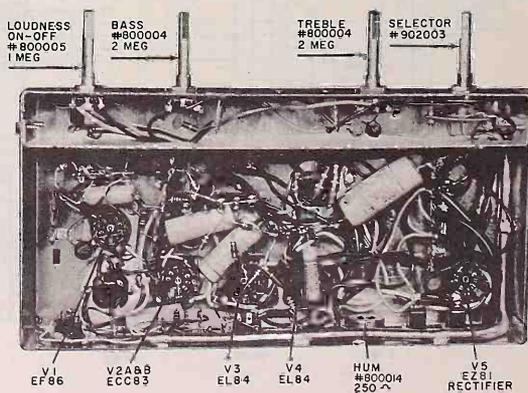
BOTTOM VIEW OF AMPLIFIER CHASSIS 1108
